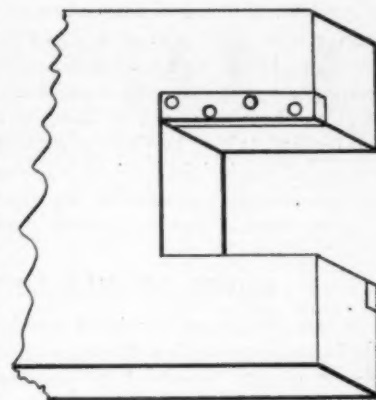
The tool steel facing of the coupling, to fit turned steel bolts.
